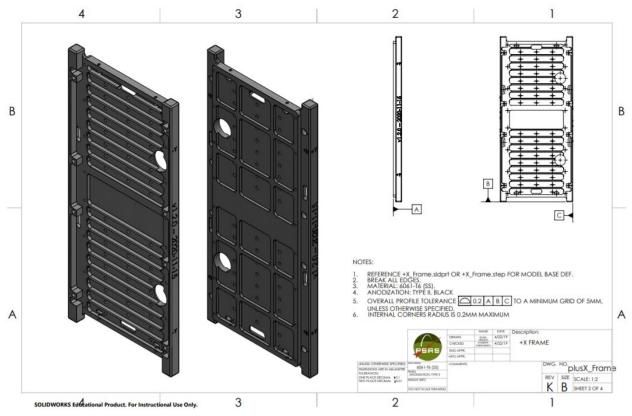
1 of 3 Dimensioned Drawing of the plus X OreSat Frame
